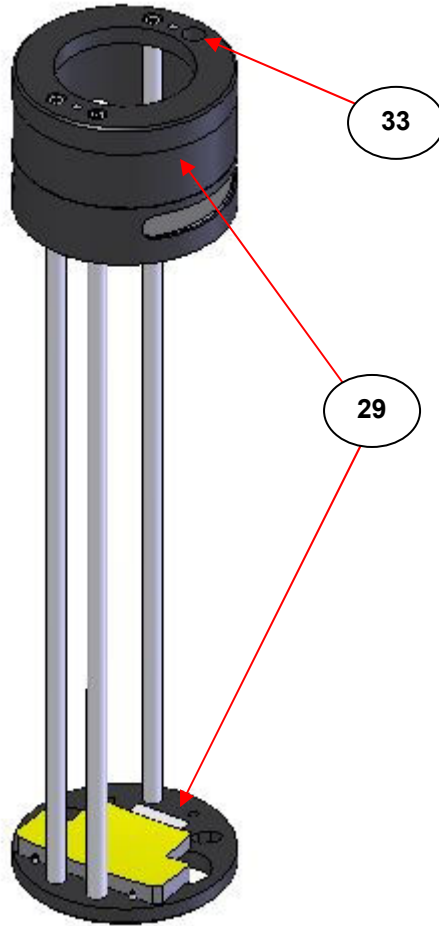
Tornado™ T5 Mirror Carriage Frame Assembly
